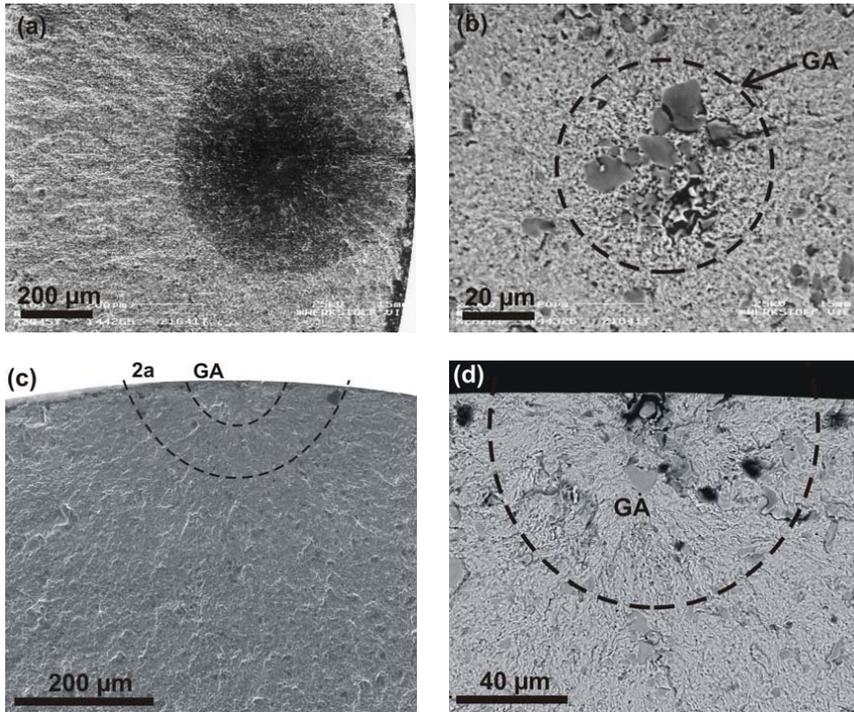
Fractographs of specimens with initially high compressive residual stresses at the surface: (a), (b) internal fish-eye failure of specimen failed at 800 MPa after 3.6×10^7 cycles; (c), (d) failure due to surface carbide at 640 MPa after 2.96×10^8 cycles.
